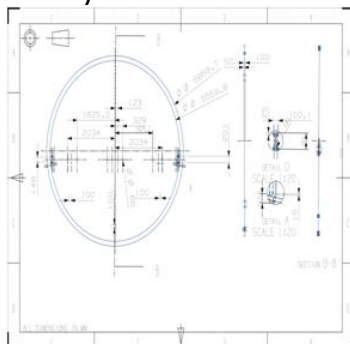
The geometrical 2D CAD model of Floor/Cross beam in Aircraft
